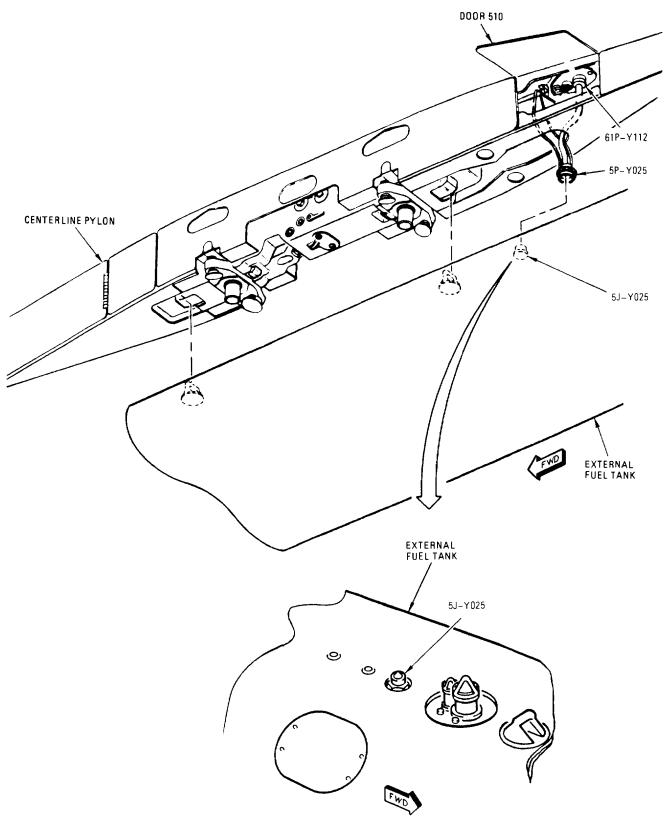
Refuel/Defuel System Component Locator (Sheet 11)
